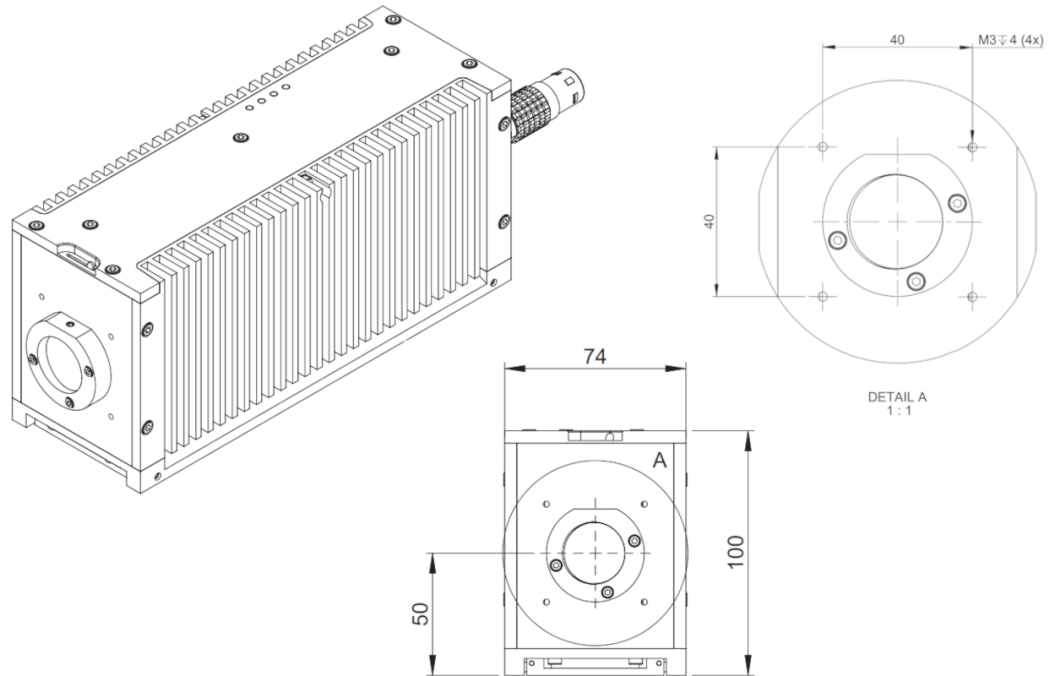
Front view of an freespace LDH-FA laser head with bulk housing
